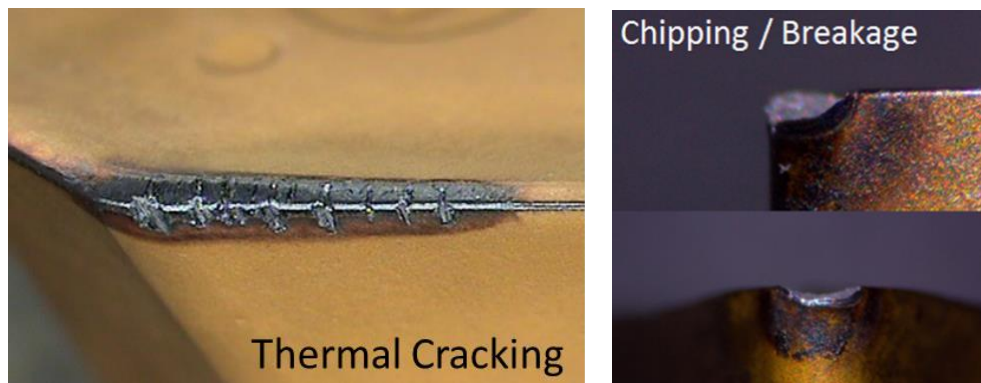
Thermal cracking and chipped cutting edge
